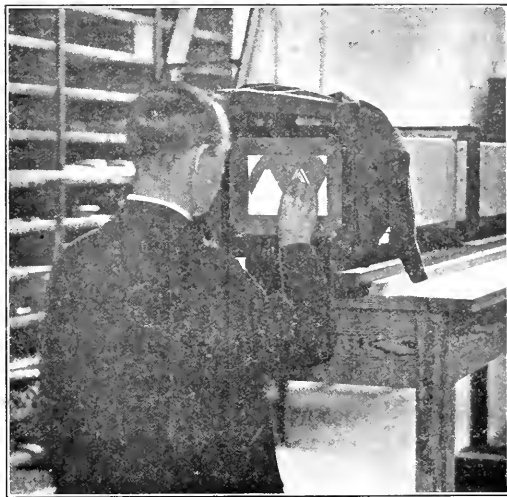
PROJECTION MACHINE FOR CHECKING CONTOUR OF THREAD
